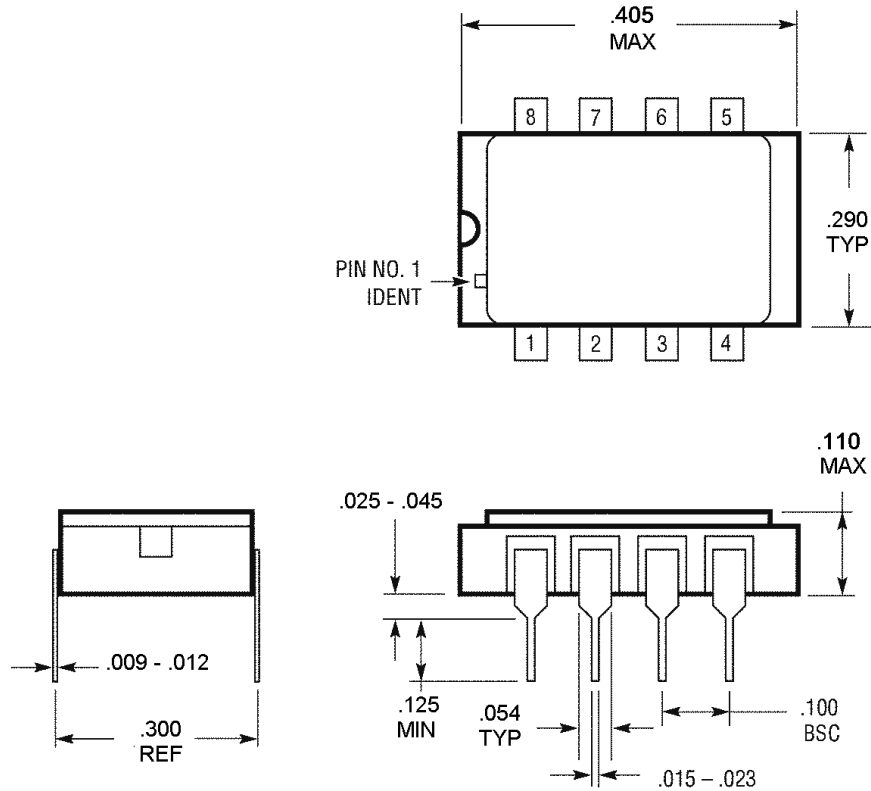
Mechanical Outline - 8L Ceramic Sidebrazed DIP
